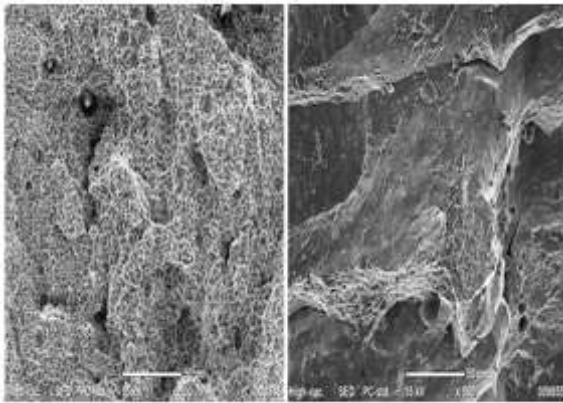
SEM fractographs of tensile tested specimens: (a) as-welded; (b) heat treated.
